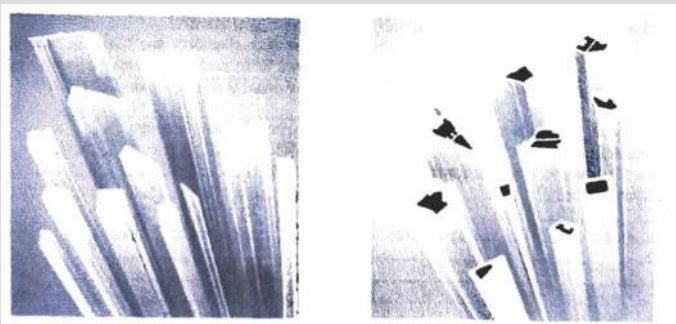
Examples for solid (left) hollow extrusions (right) made of different magnesium alloys
